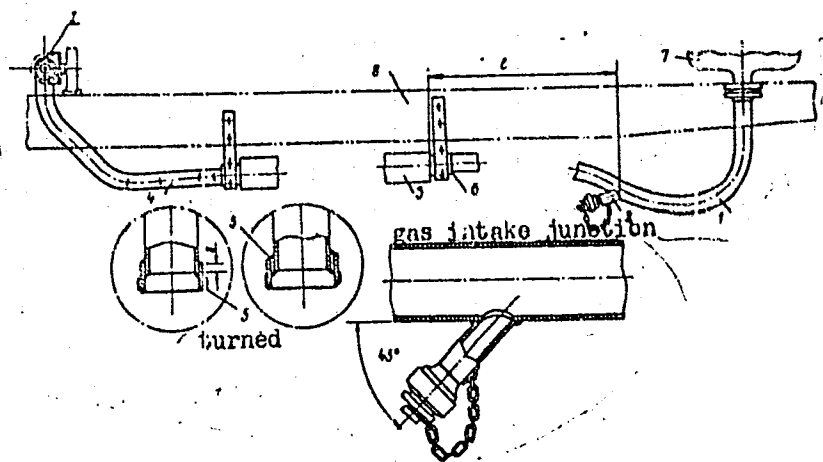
Schematic drawing of motorcar mounted auxiliary equipment: 1 - receiving exhaust pipe; 2 - gas collecting nipple; 3 - muffler; 4 - outflow pipe; 5 - nipple; 6 - seal; 7 - engine; 8 - frame.
